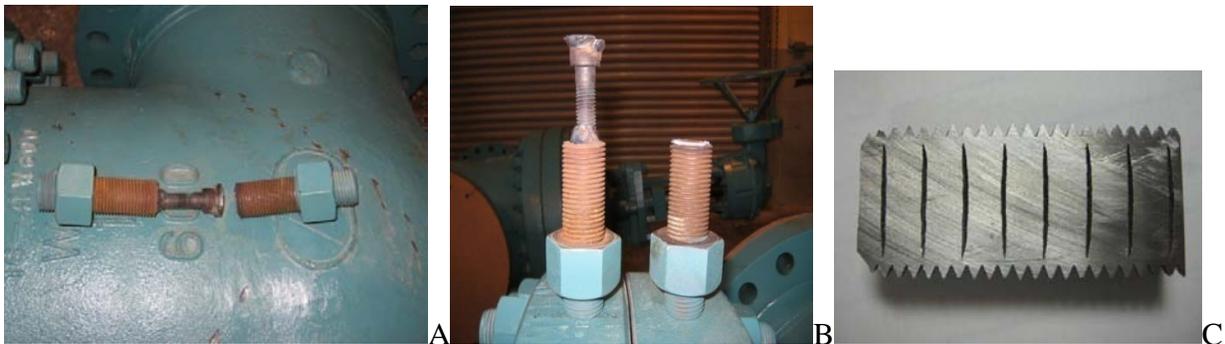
Counterfeit bolts. A) Bolts welded together to hide deficient piece. B) Bolts welded together to hide deficient piece. C) Bolt with visible voids
